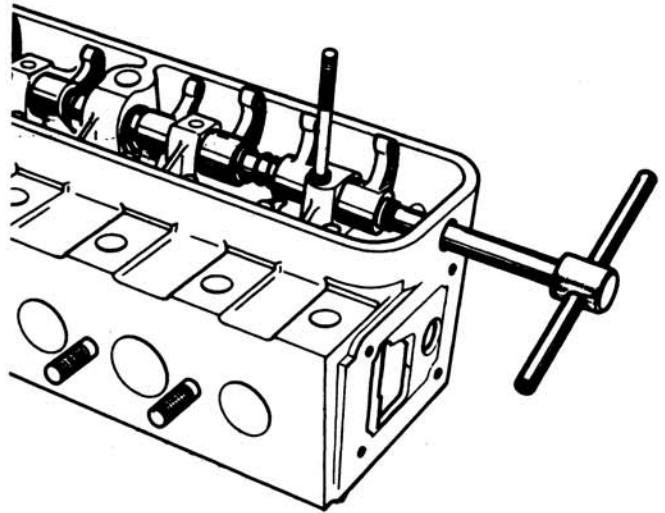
WITHDRAWING ROCKER ARM SHAFTS
